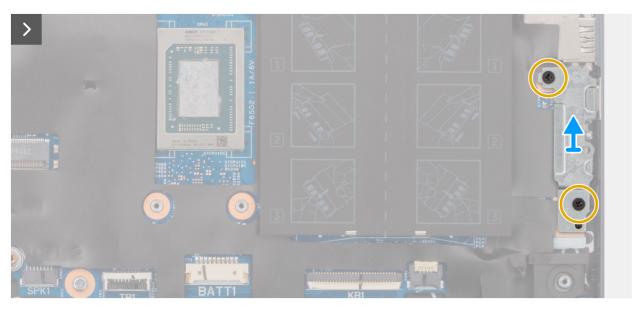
Removing the system board (for computers shipped with an aluminum chassis)
